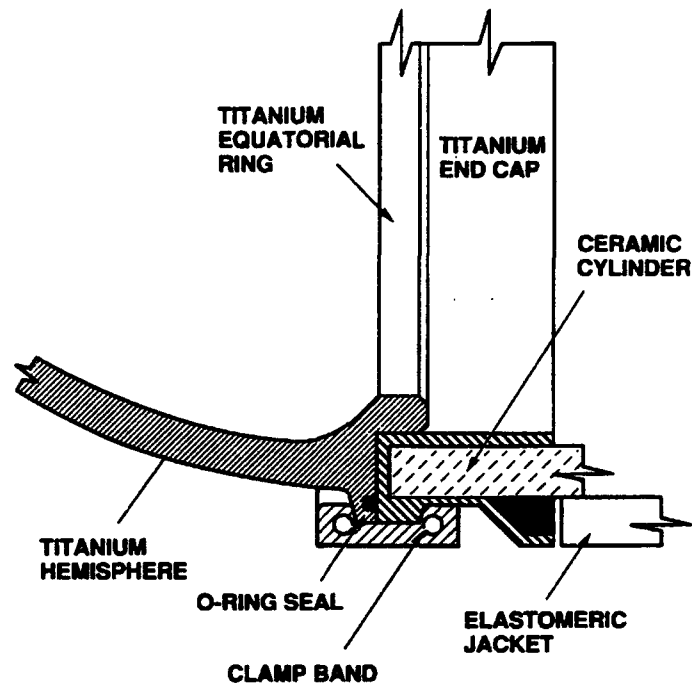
Optimized joint between ceramic cylinder and metallic bulkhead incorporating the improved Mod 1 end cap.
